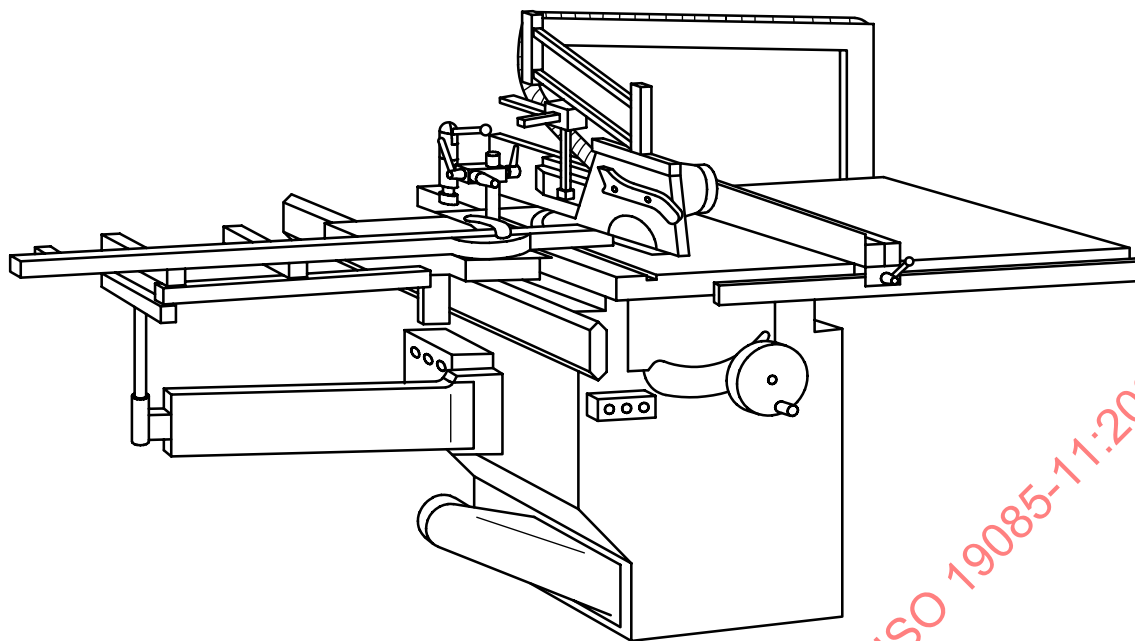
Example of a machine with table saw and moulding units, fitted with a sliding table
